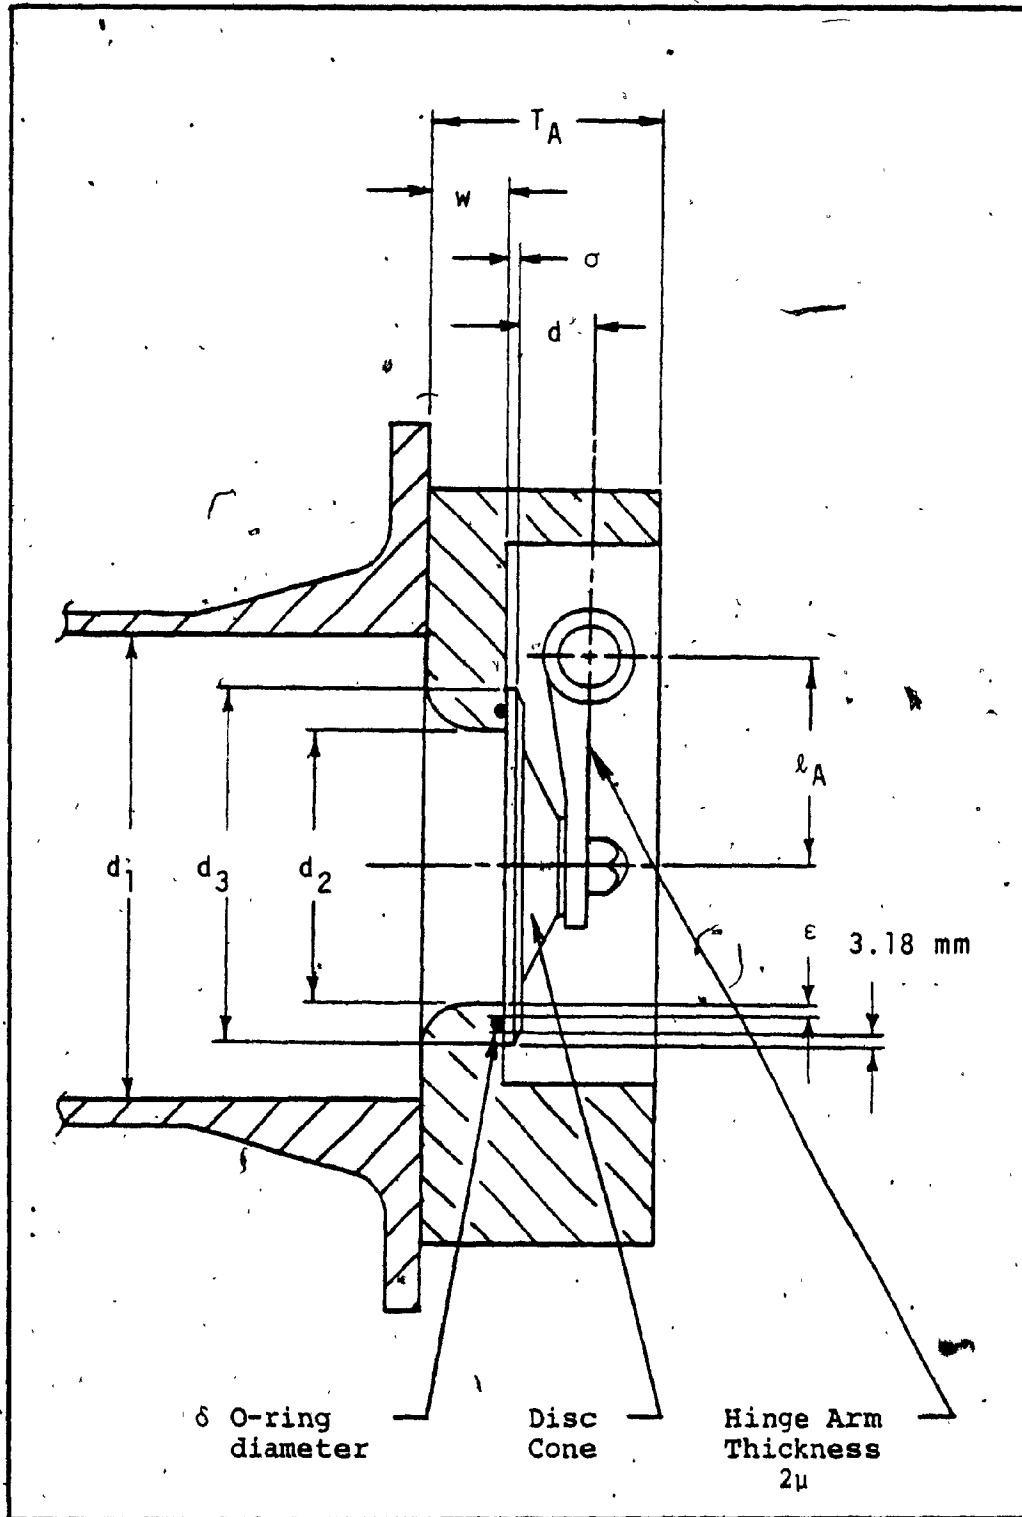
lb. Basic Design of Ritepro Wafer Valve (soft seat seal type)
